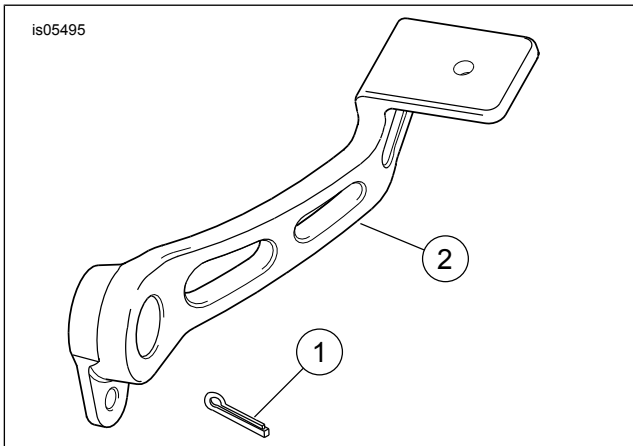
Service Parts: Billet-Style Rear Brake Lever
